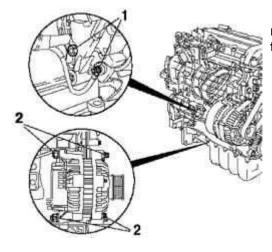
Mounting generator: 1 - nuts contacts generator, 2 - stud fastening
